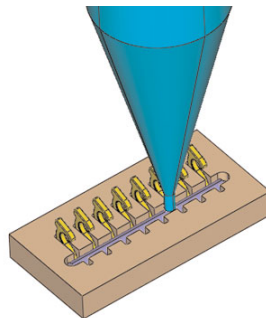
TUCK THE NEW ELASTOMER INTO THE SLOT WITH THE ELASTOMER TOOL.
